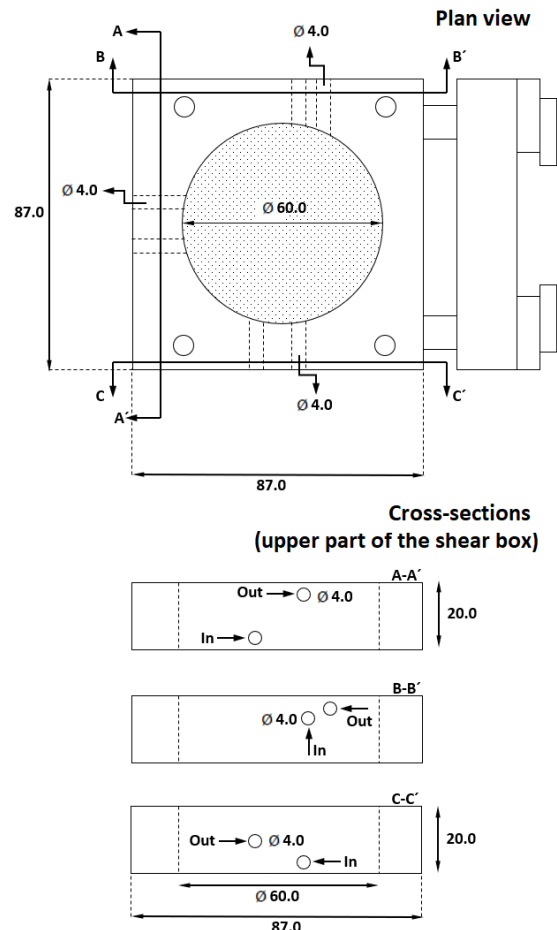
Schematics of the adapted direct shear box, as well as inlet and outlet holes (dimensions in millimeters).
